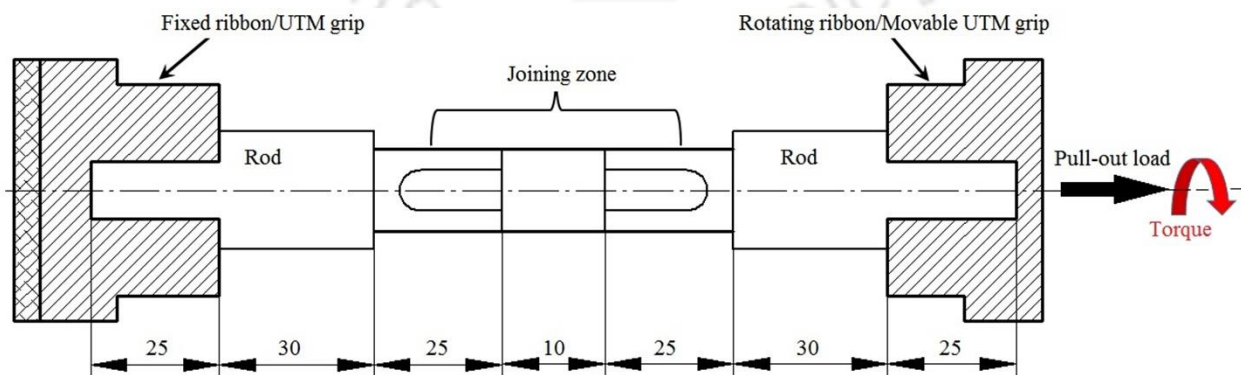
6 Testing condition for torsion and pull-out test (All dimensions are in mm)
